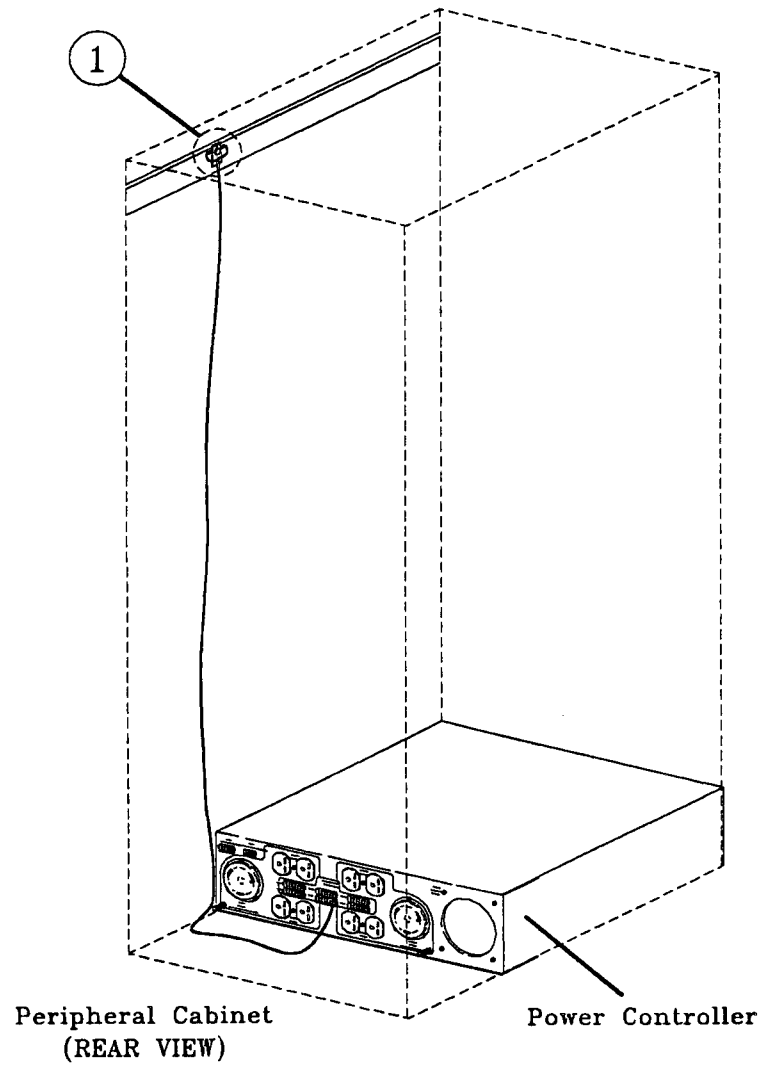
, Peripheral Cabinet Thermostat Assembly
